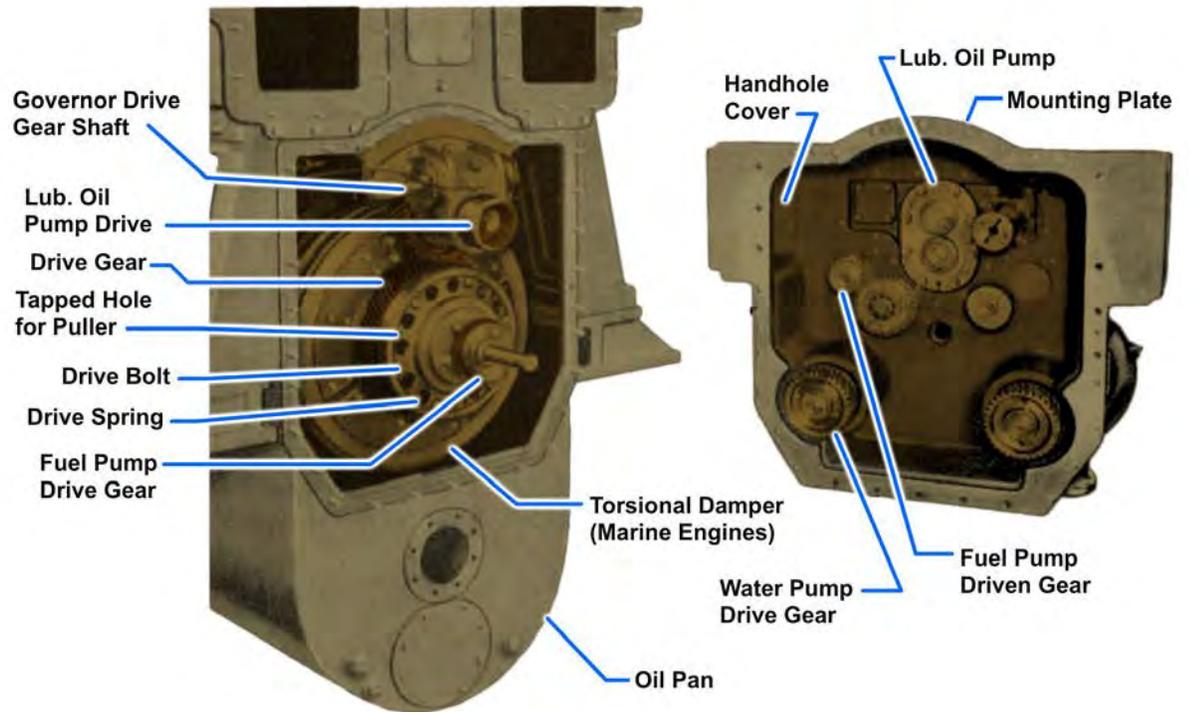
Accessory drive (Fairbanks-Morse 38D8 1/8).
